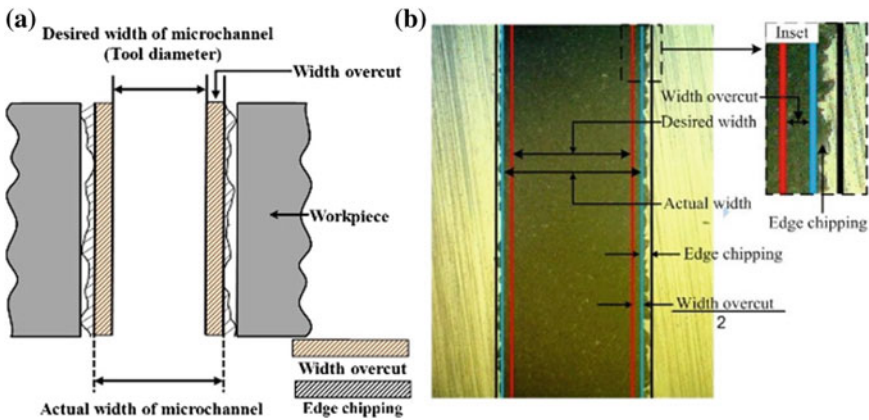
a Schematic of WOC, b top view of machined micro-channel
